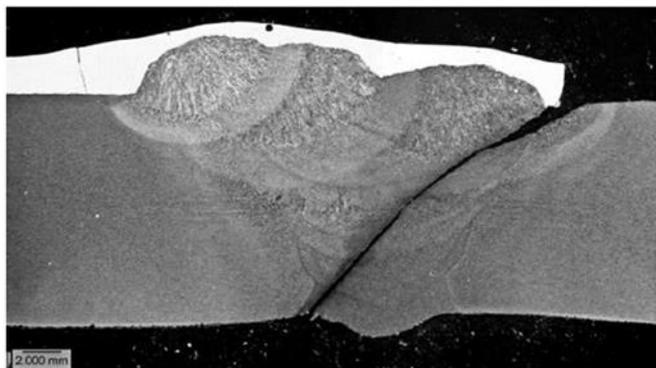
Failure of a girth weld with weld strength undermatching in the absence of weld flaws
